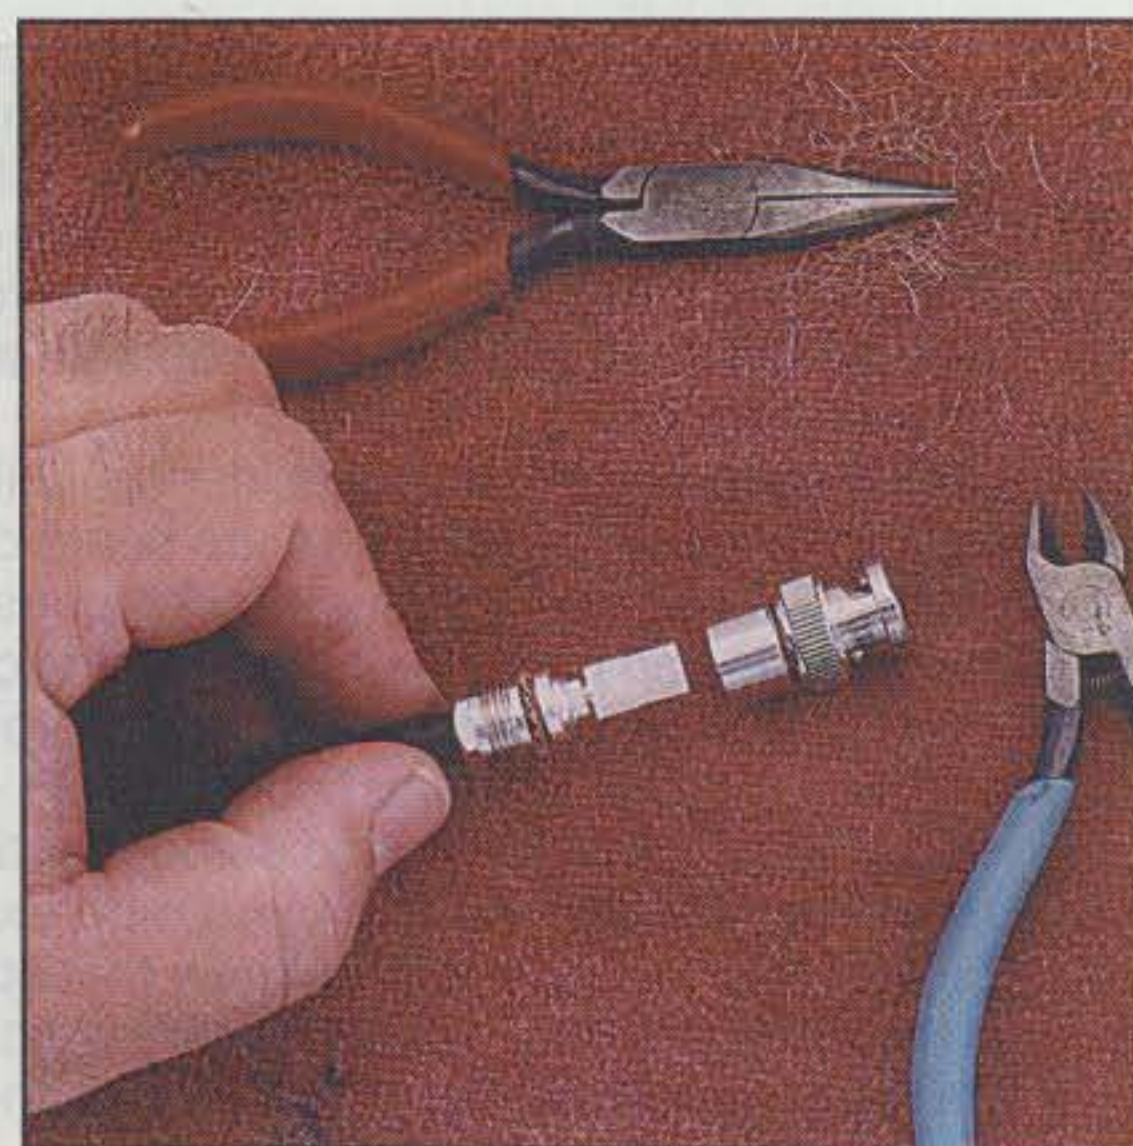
Slide the shell onto the assembly. Hold the cable and connector body still with a wrench while you turn the locknut. Try not to twist the connector body, since that may twist the wires inside the connector.
